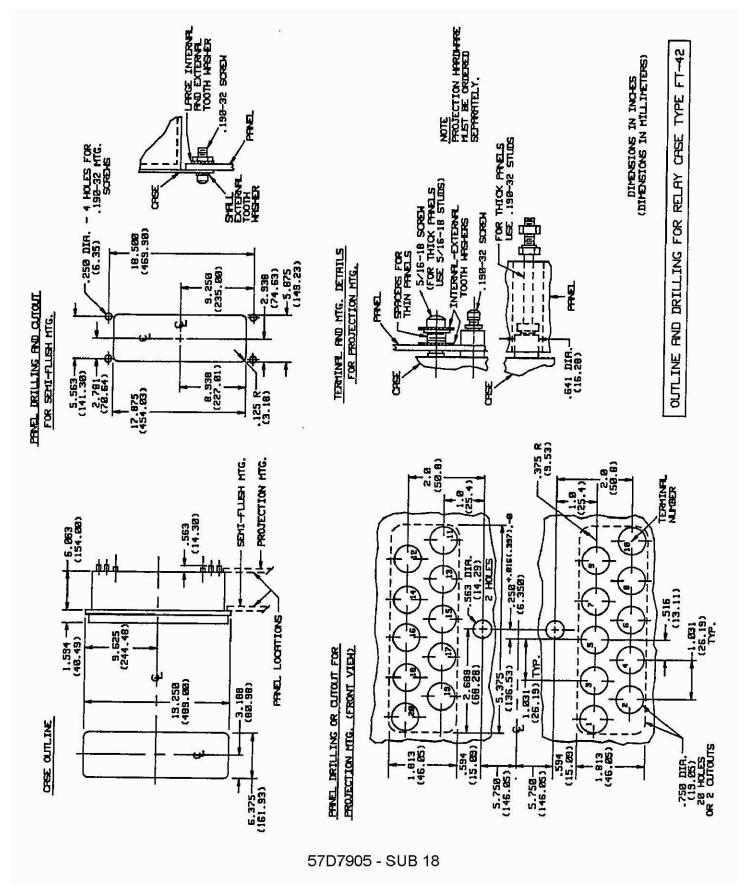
F11, Sub 10, page 1 of 2 Drawing 1749F11, Sub 10, page 2 of 2 Drawing 1486B46, Sub 2 Drawing 1486B45, Sub 7 Drawing 57D7905, Sub 18
